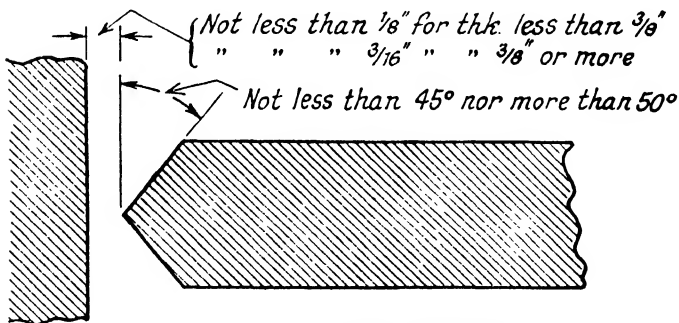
DOUBLE BEVEL BUTT WELD
